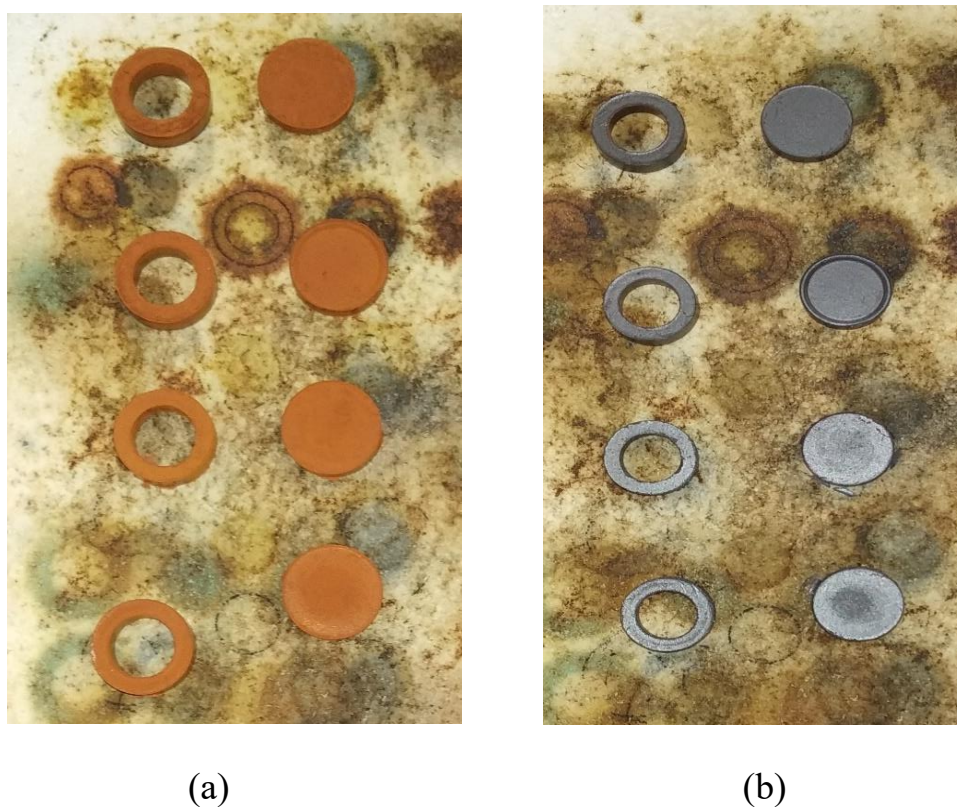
Toroid and cylindrical shaped samples put on ceramics plate (a) before sintering (b) after sintering.
